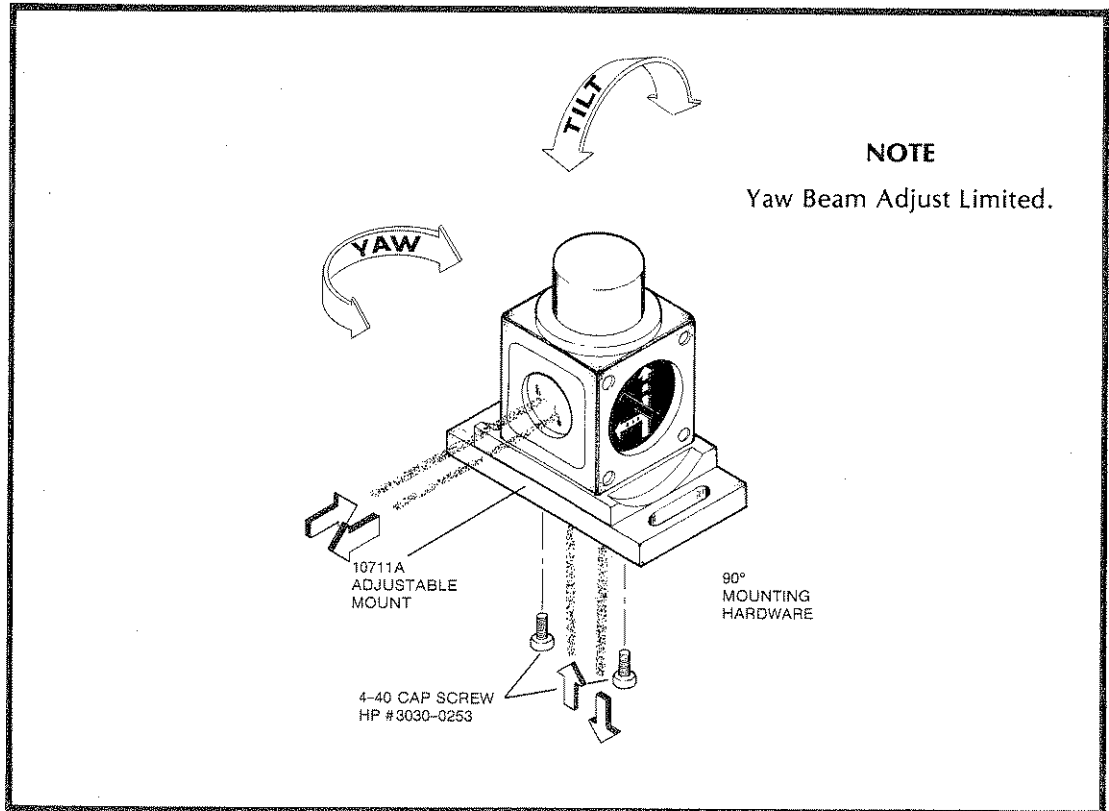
Vertical Plane Mounting Using the 10711A Adjustable Mount
